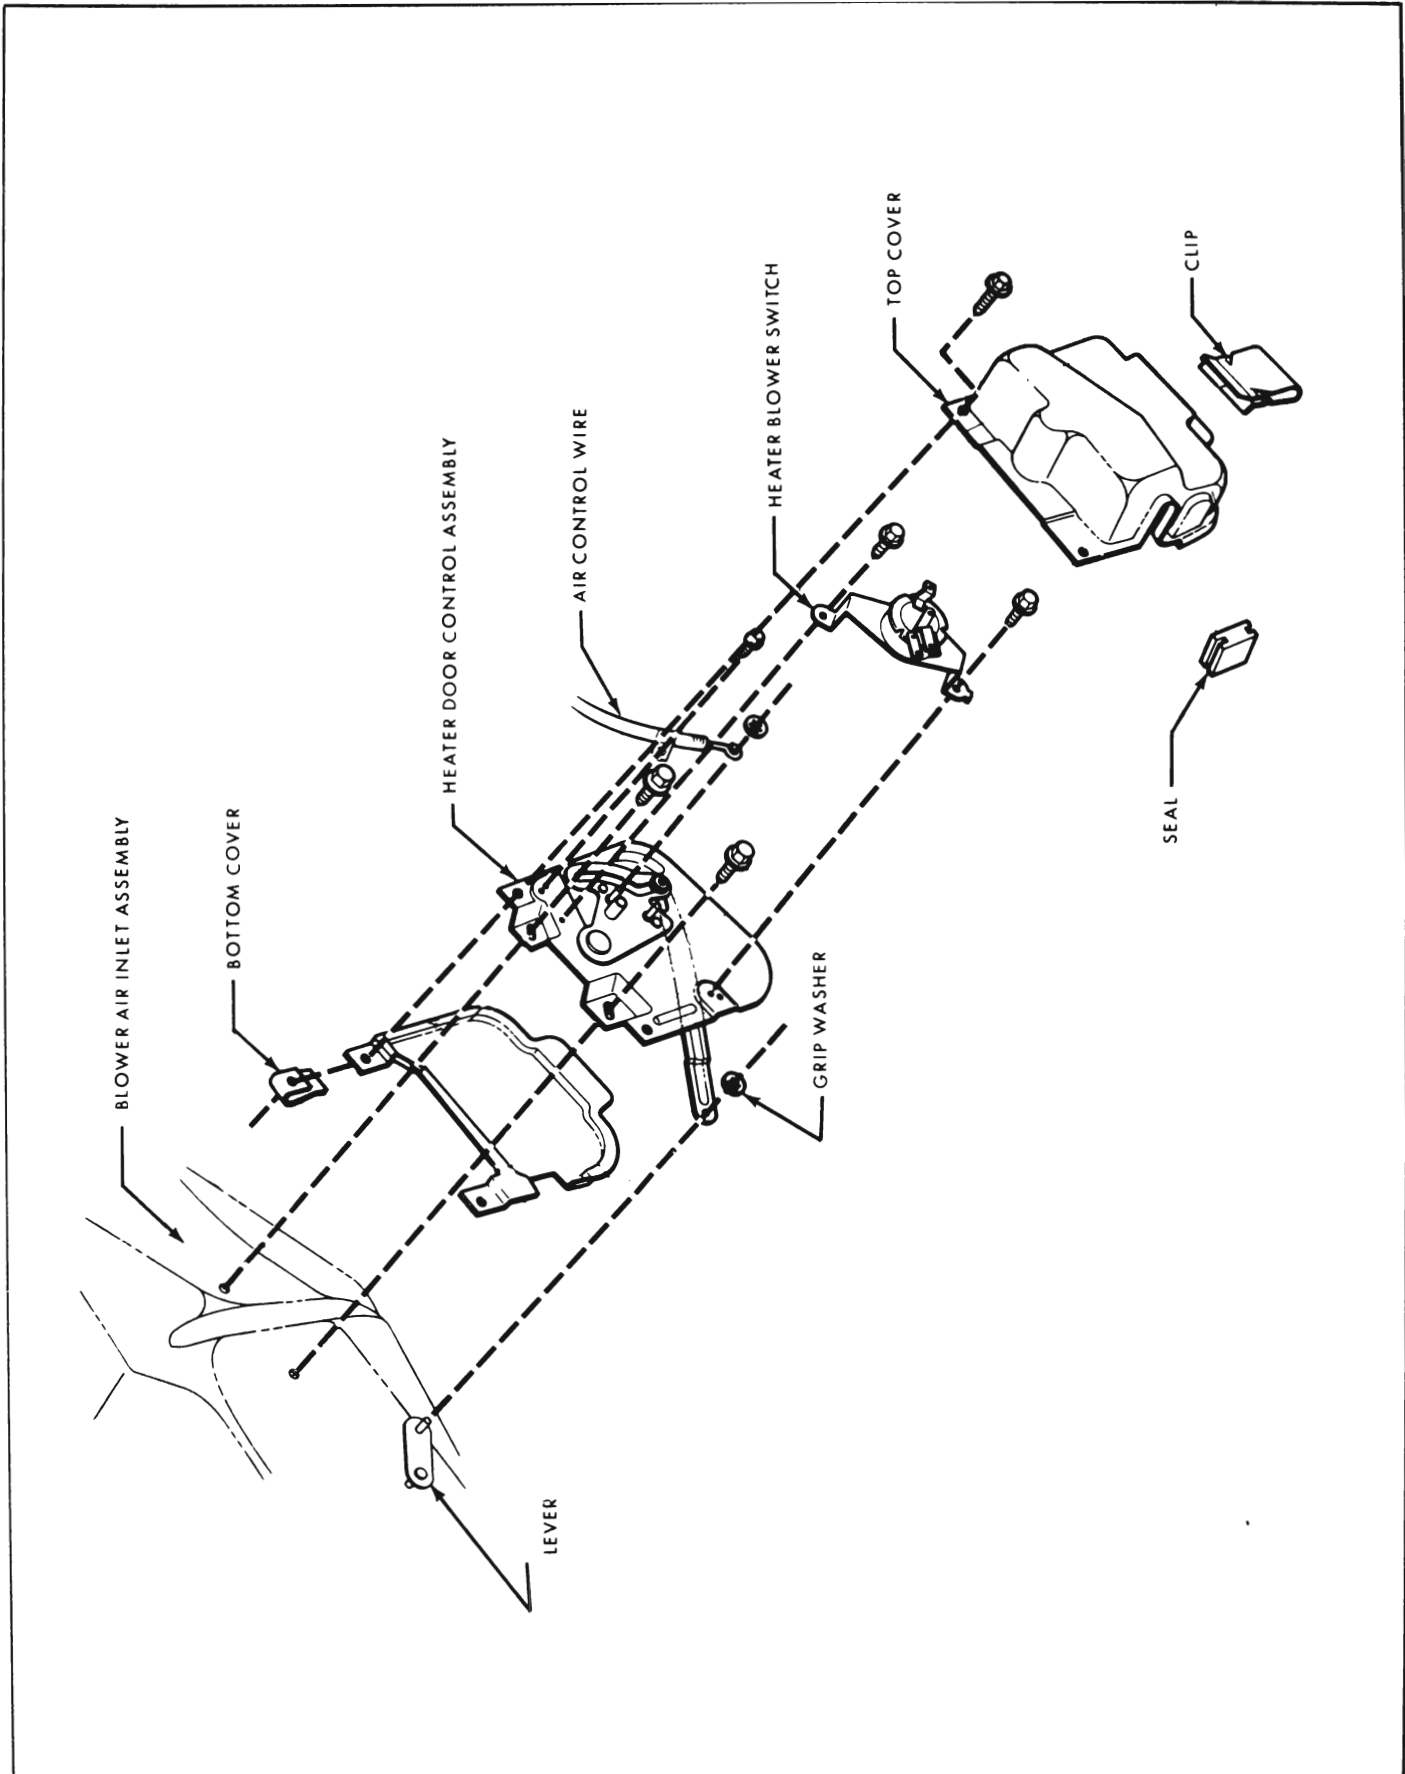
Heater Door Control Assembly - 4400, 4600 and 4800 Series
